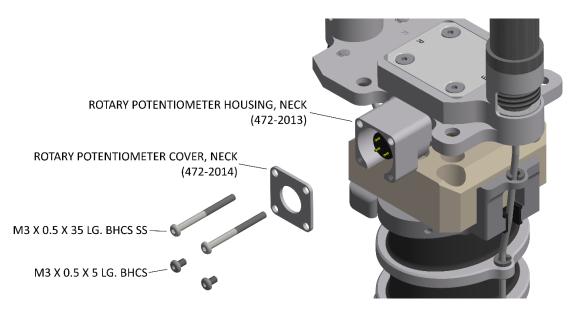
Installation of Rotary Pot Housing to Head/Neck Platform
